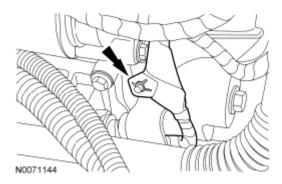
Locating Starter Wire Harness Retainer And Starter Motor Stud Bolt Courtesy of FORD MOTOR CO.
